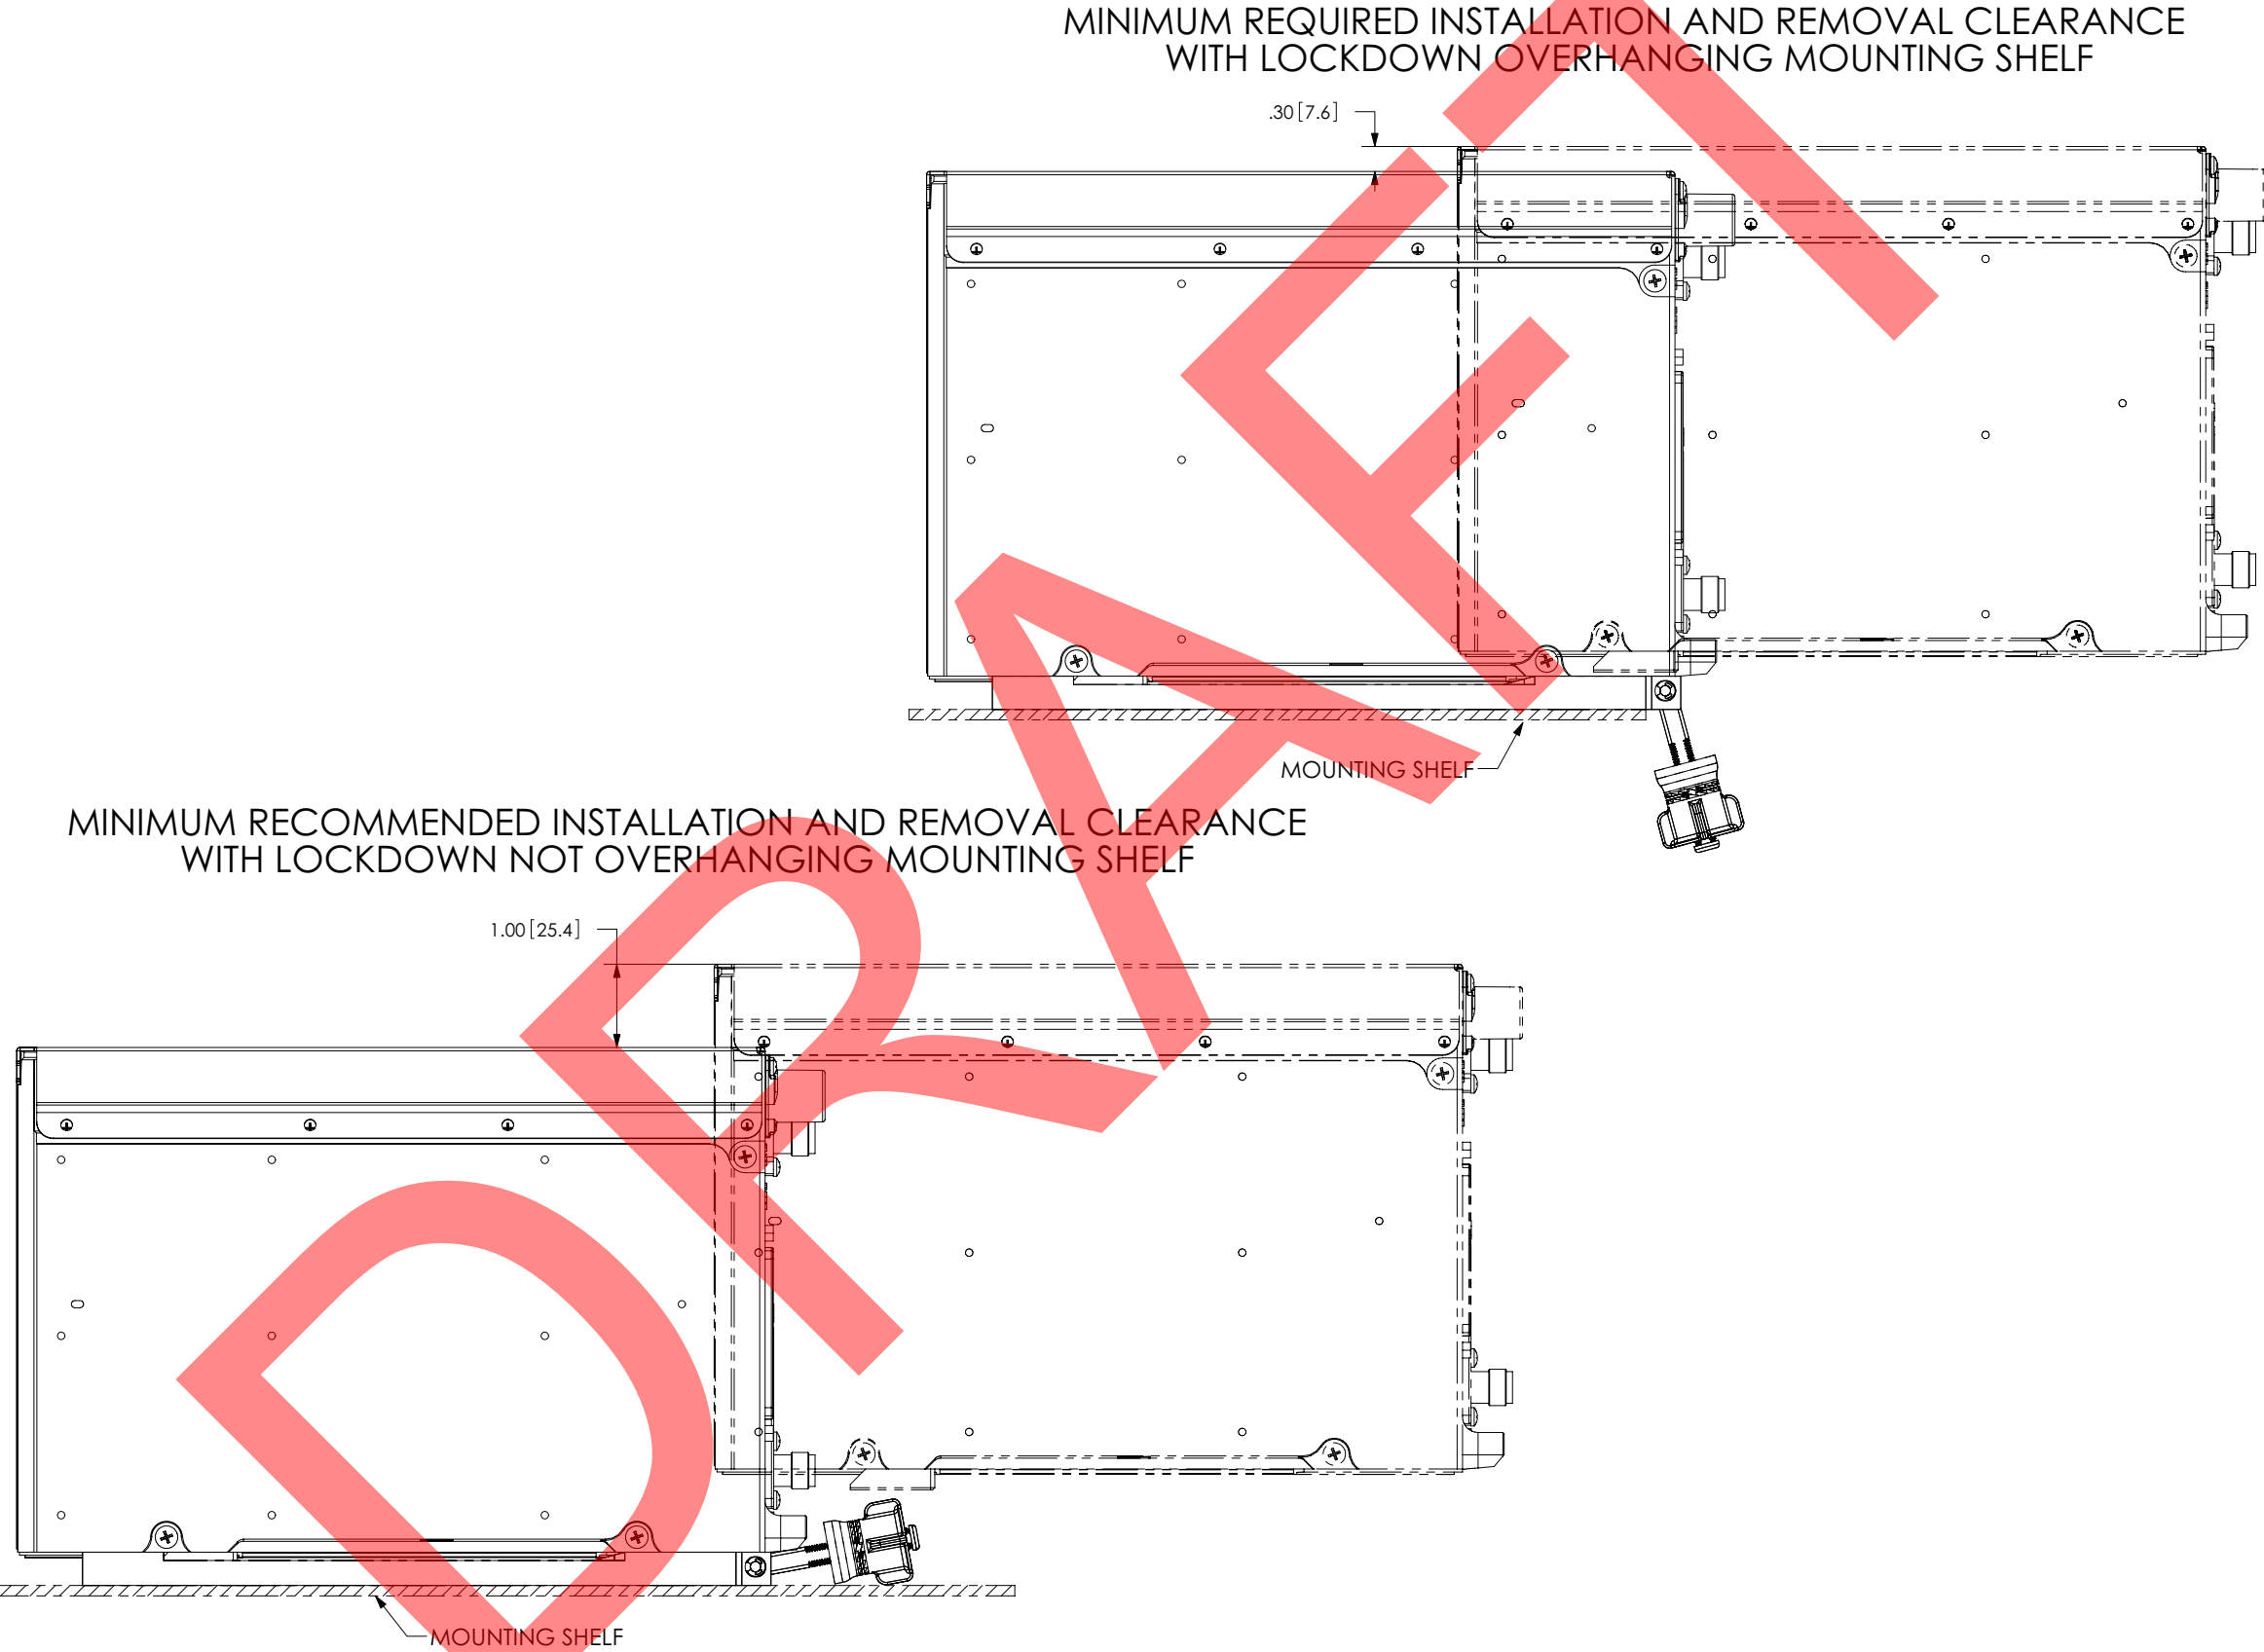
GTX 3000 Minimum Installation/Removal Clearance
